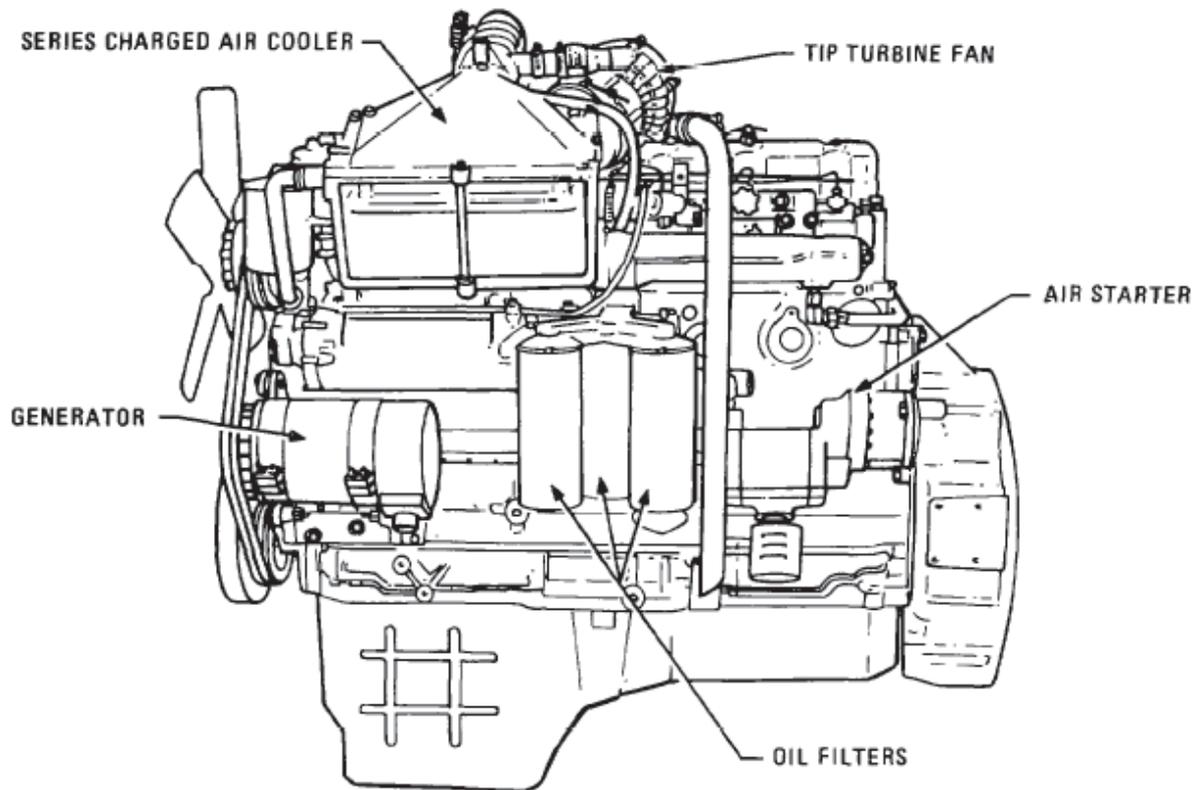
Engine EM6-285 Mack, Left-hand Side View
